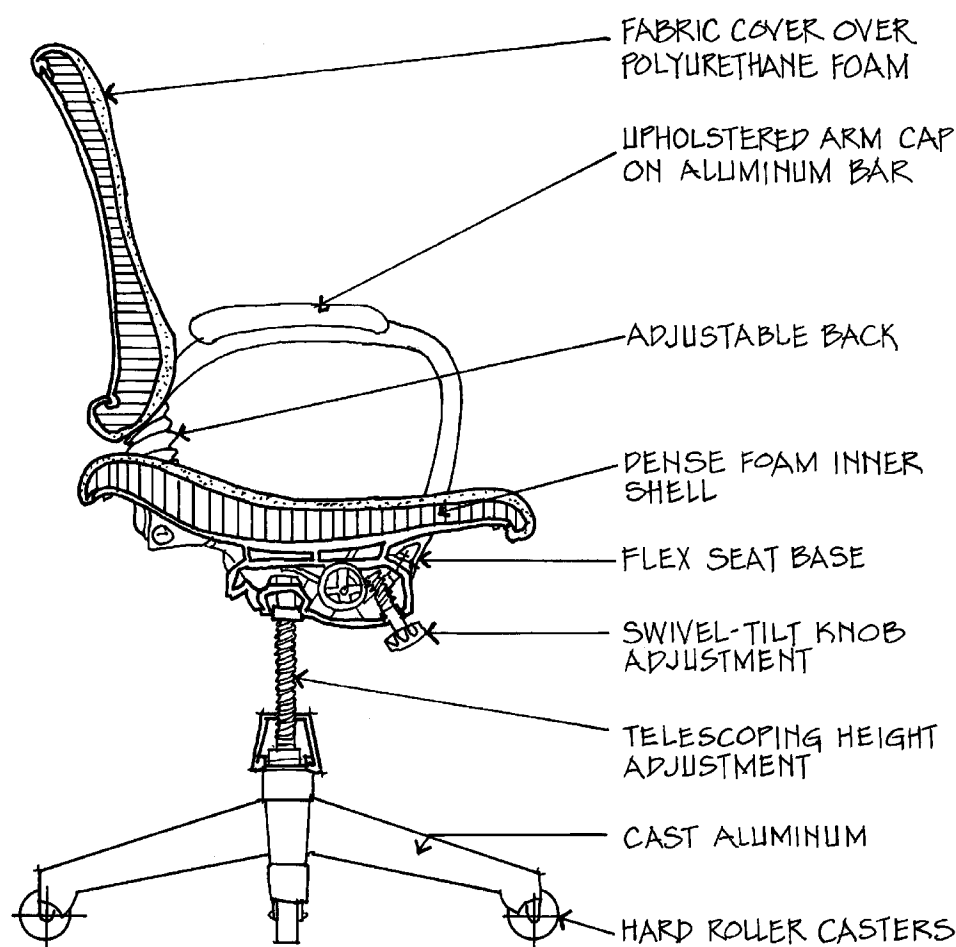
This cutaway view of an office chair shows the many adjustable and construction features that make it user friendly.
